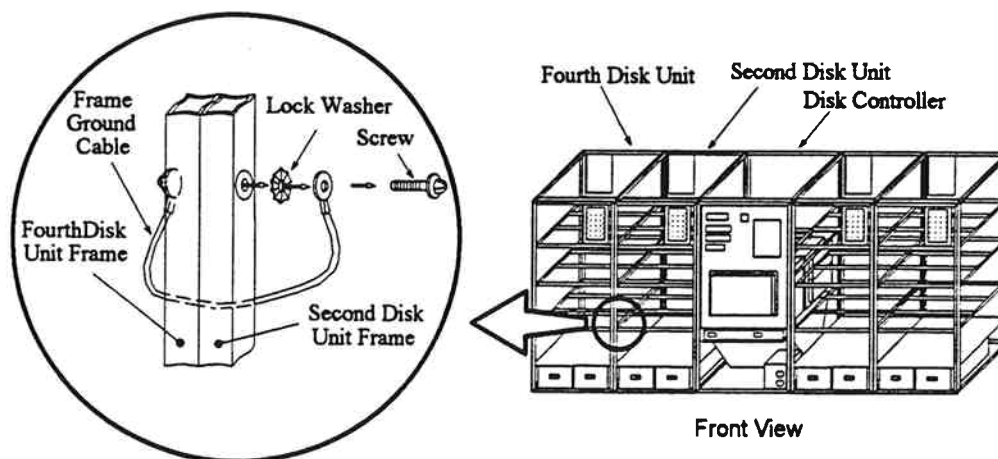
Removal of Frame Ground Cable
